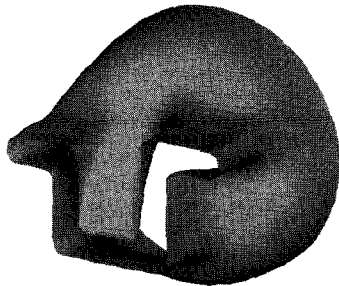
B-spline die surface in the extrusion of round-to-non-symmetric U-shaped section with unequal flanges
